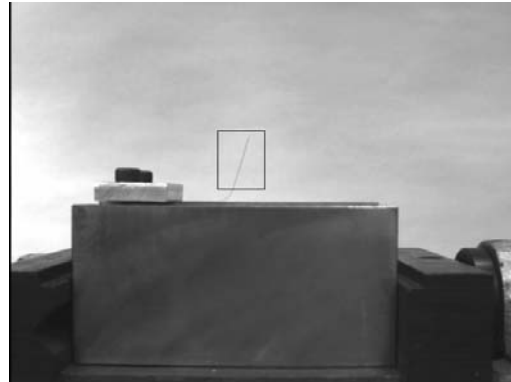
An image of a deformed metallic sheet and the lower tool
